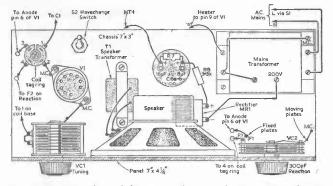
Chassis and panel dimensions, layout and wiring above chassis.
